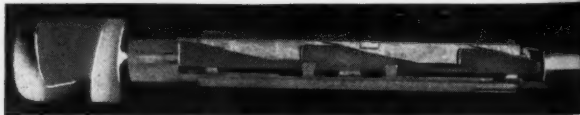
Sunnen Hone parts disassembled to show expanding mechanism.
